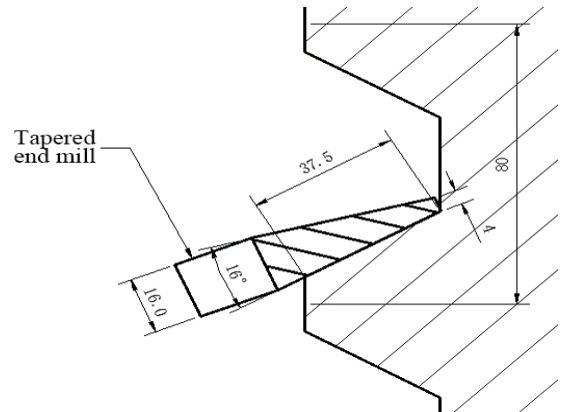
Using 3-flute tapered end mill to machine screw thread along the thread profile.
